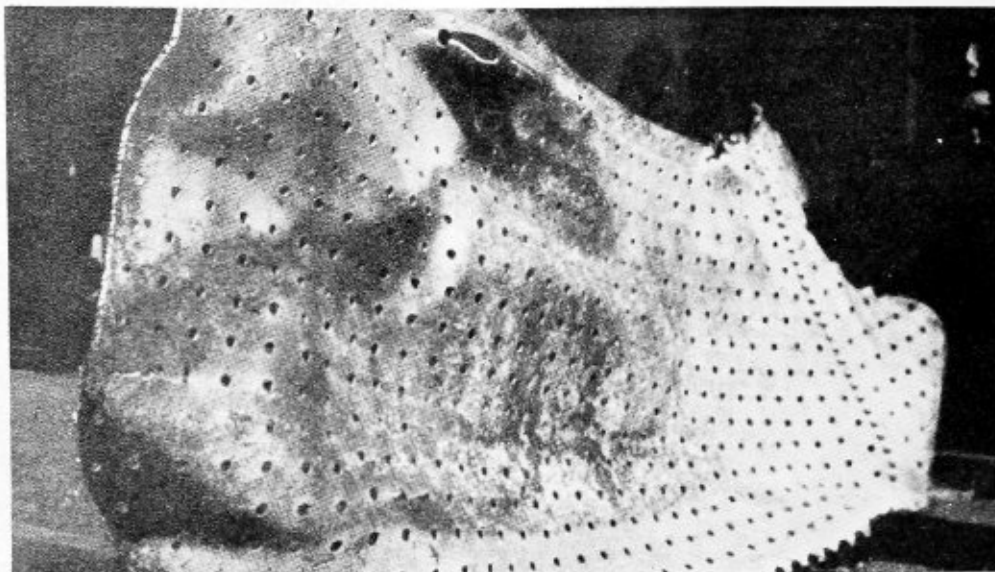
(Below) Rear view of back end, including back head. Fig. 5.—(Left) Water side of overheated left side sheet
